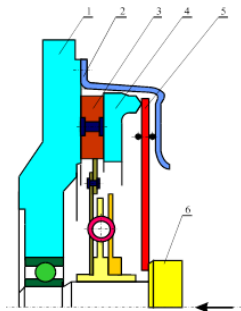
Clutch components : 1.Flywheel 2.Clutch cover 3.Driving disc 4, Pressure plate 5. Diaphragm spring 6. Release bearing
